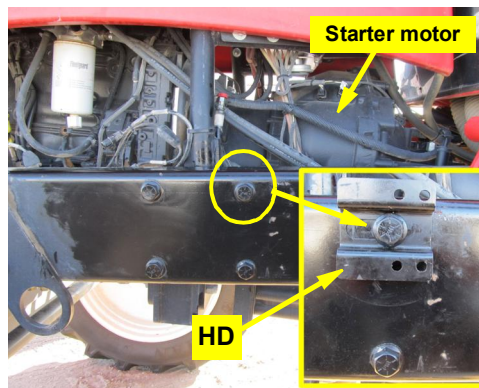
with inset: Installed steering block mounting bracket - fully forward on the slot
